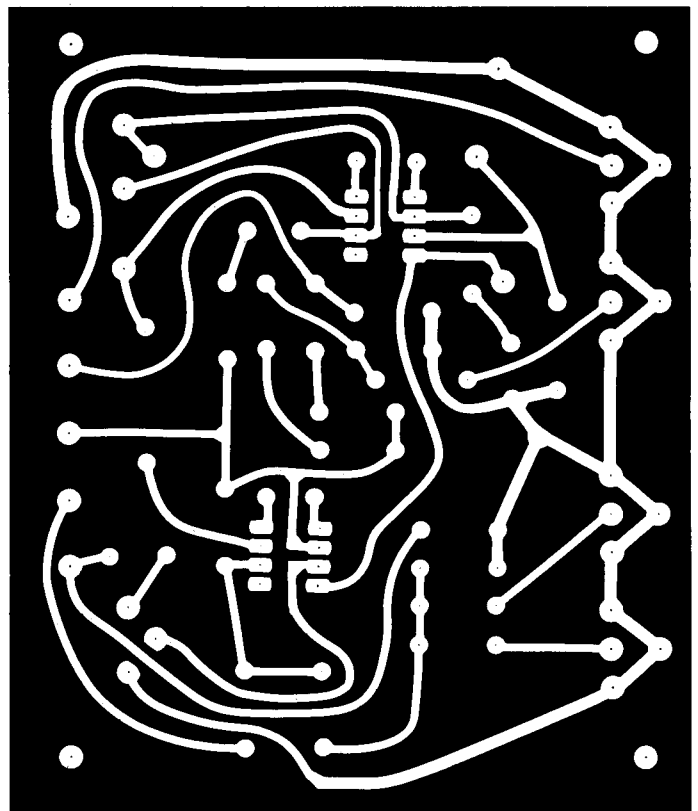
Actual-size foil pattern for a pc board is at right; component layout above.
